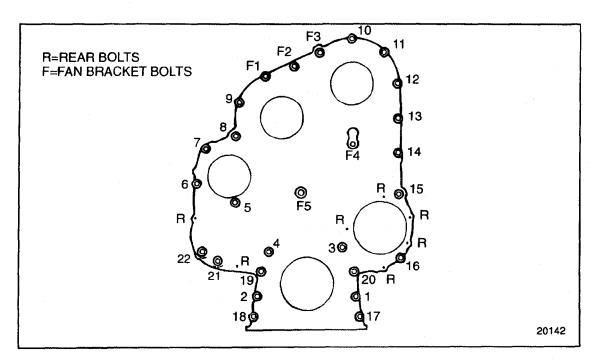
Gear Case Cover Mounting Bolt Locations
